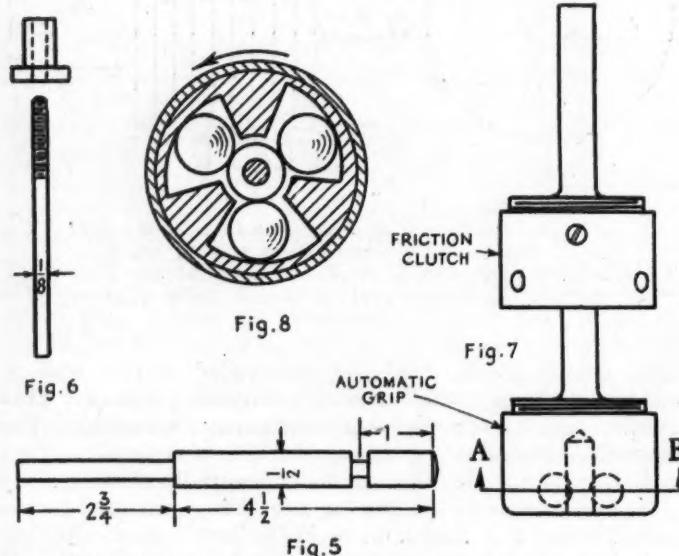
Special stud which was produced in a modified screw machine of obsolete type. Fig. 6—Stud and butt which are assembled in a novel way. Fig. 7—Automatic Butt Setter equipped with friction clutch. Fig. 8—Cross section of the automatic gripping device
